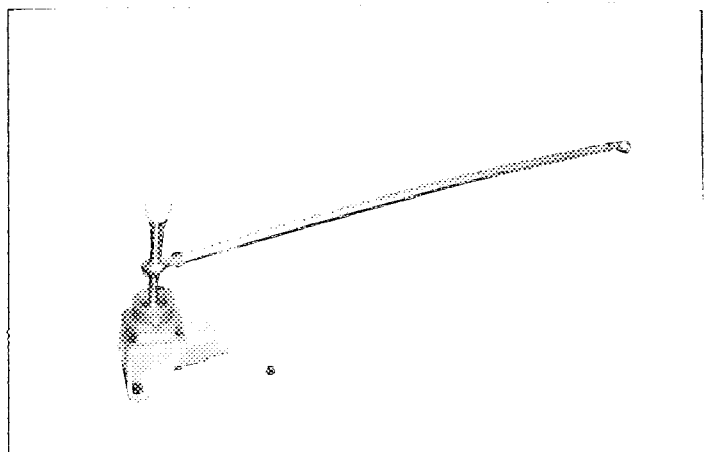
Front and/or Rear brake caliper mounting bracket, TYPE A
